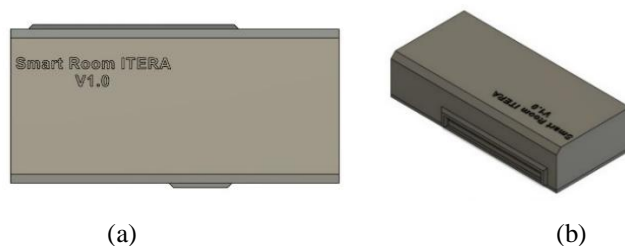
SMARTERA Casing of Products (a) Top view; (b) Bottom view
